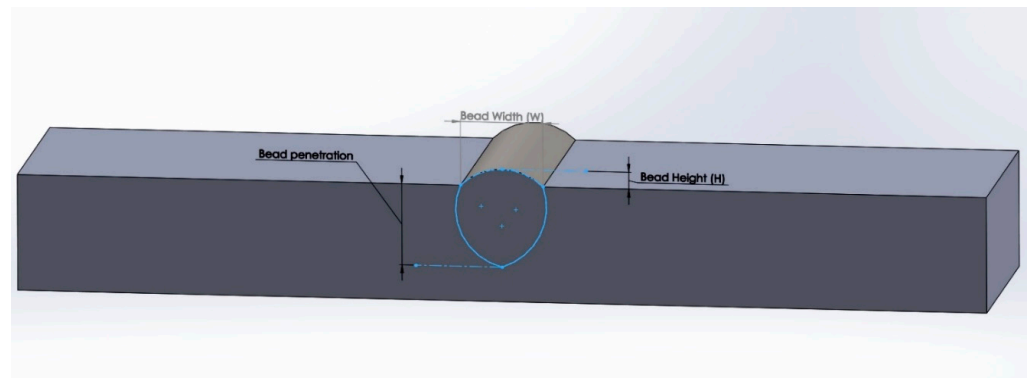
Evaluation criteria of weld bead geometry (width, height, and penetration).
